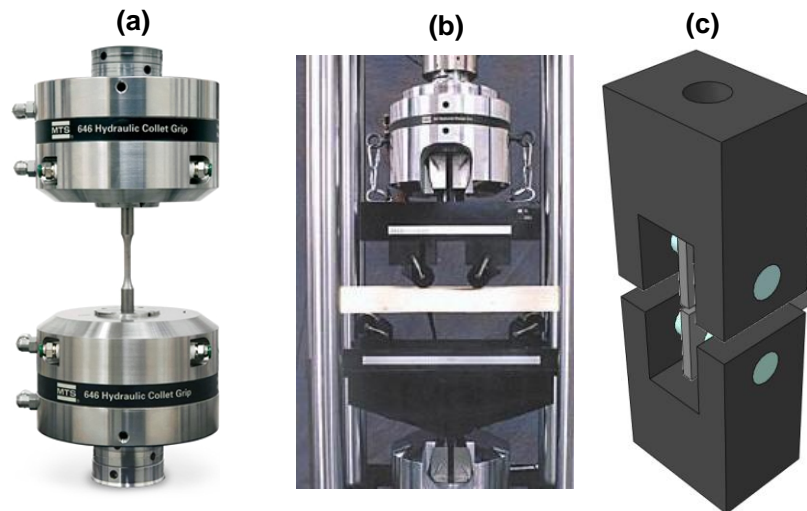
Loading machine testing fixtures for (a) tensile test, (b) 4-pt bending, and (c) Mode I compact tension
